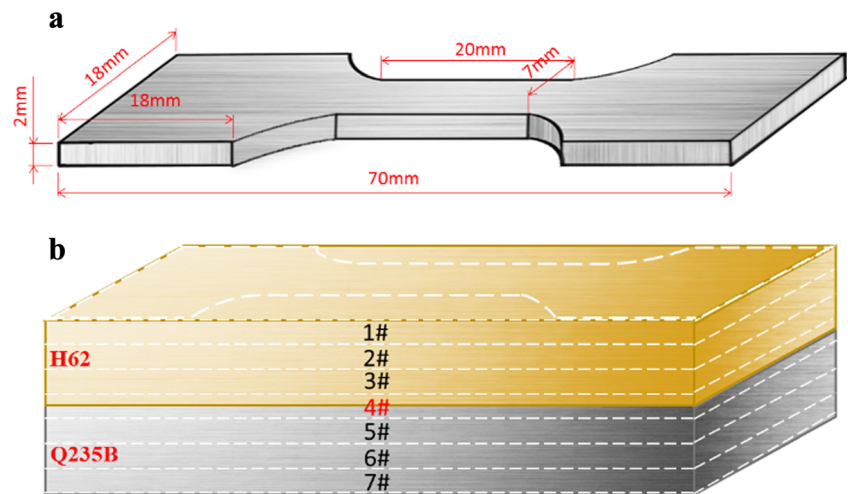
Schematic of shear test specimen of H62/Q235B clad plate
